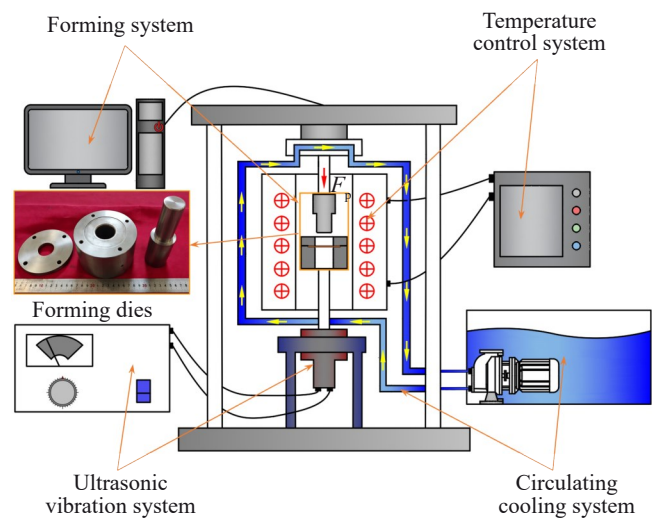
Schematic diagram of principle of ultrasonic vibration-assisted thermal deep drawing for cylindrical parts
